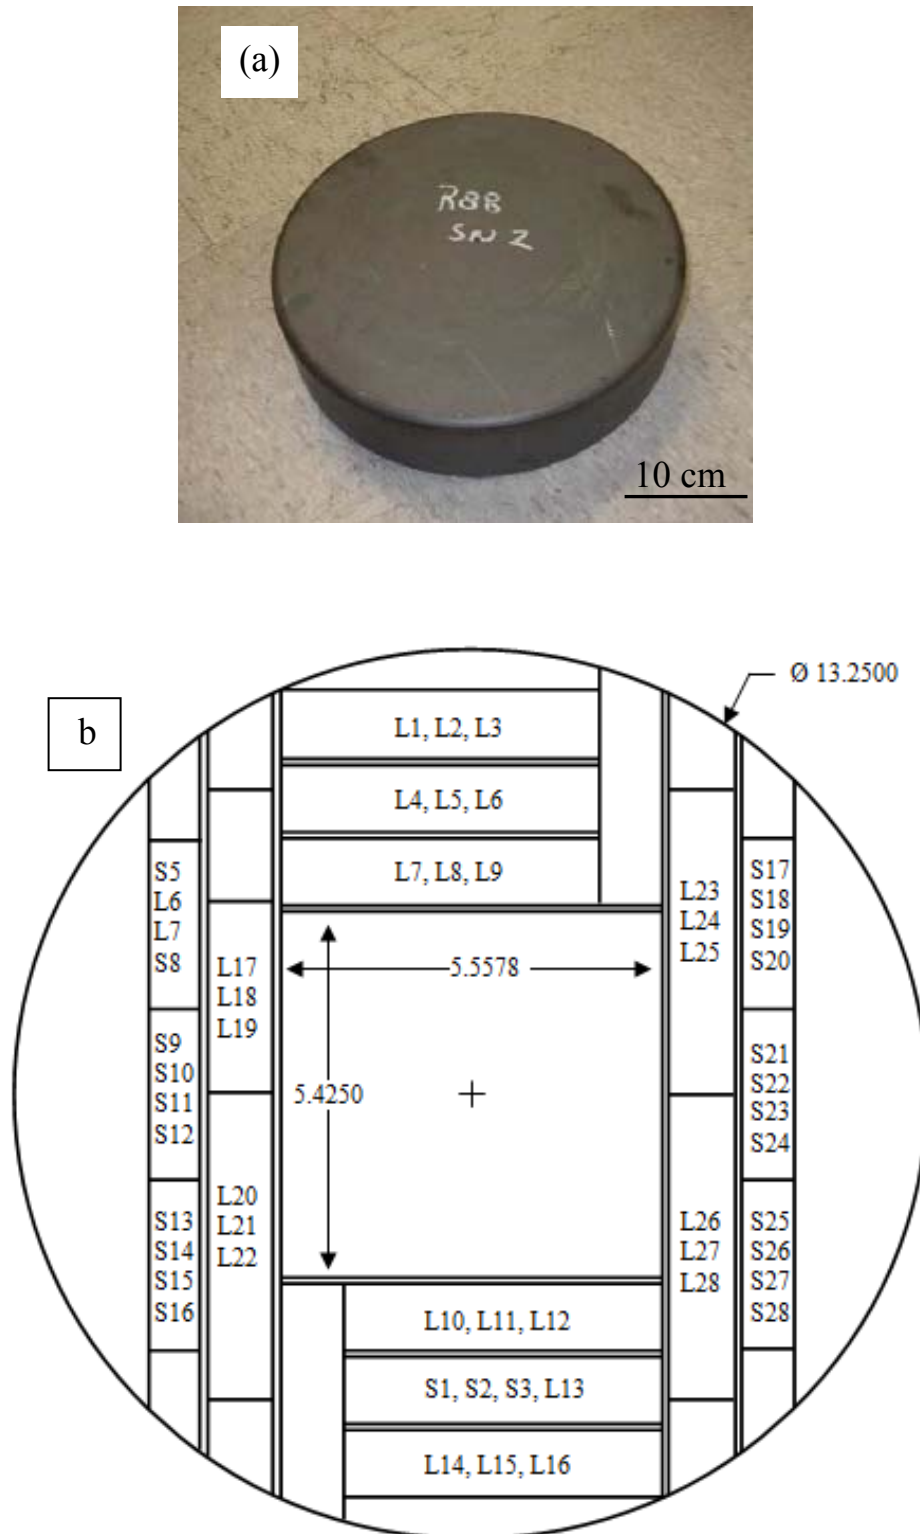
René 88 disk and the specimen blanks lay out (a) Photograph of seeded René 88 disk after forging. (b) Top view of the disk showing how specimen blanks were oriented.
